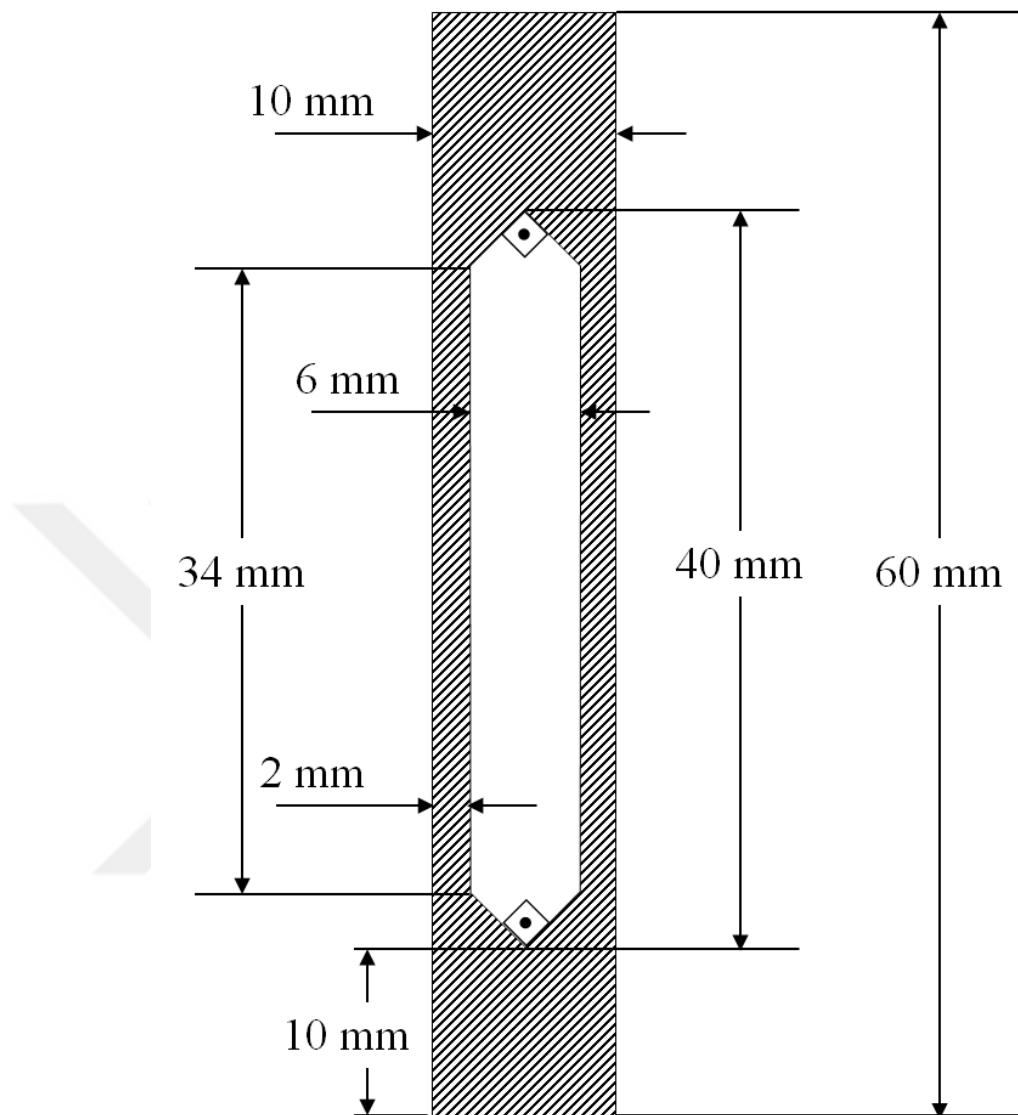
Dimension details for PD cavities on a section view for the first DoE.
